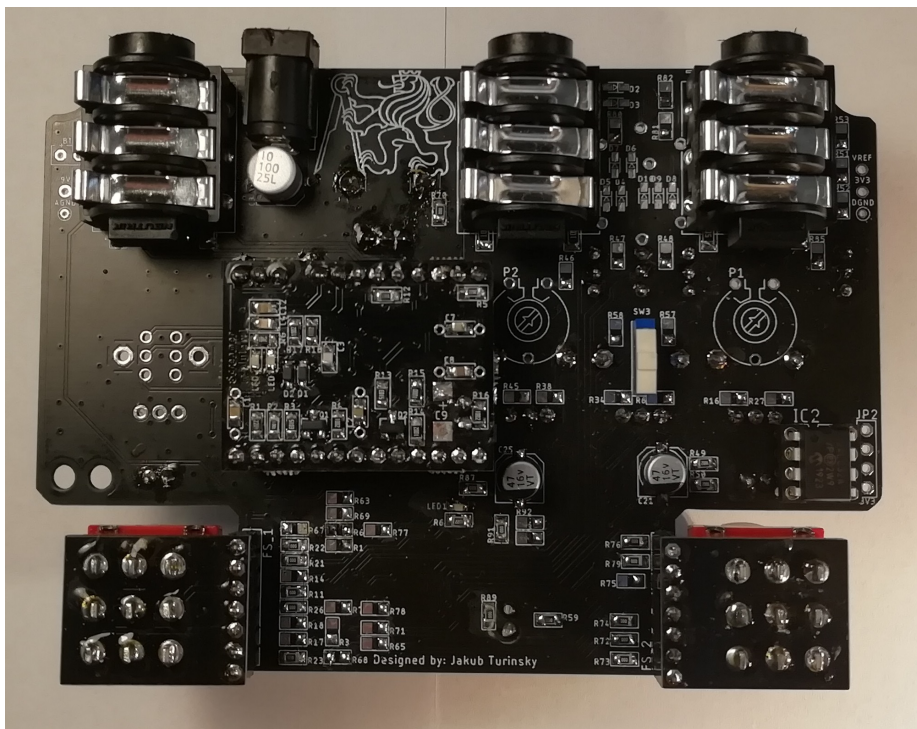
Bottom view of the fully assembled digital guitar pedal with true bypass switching.
